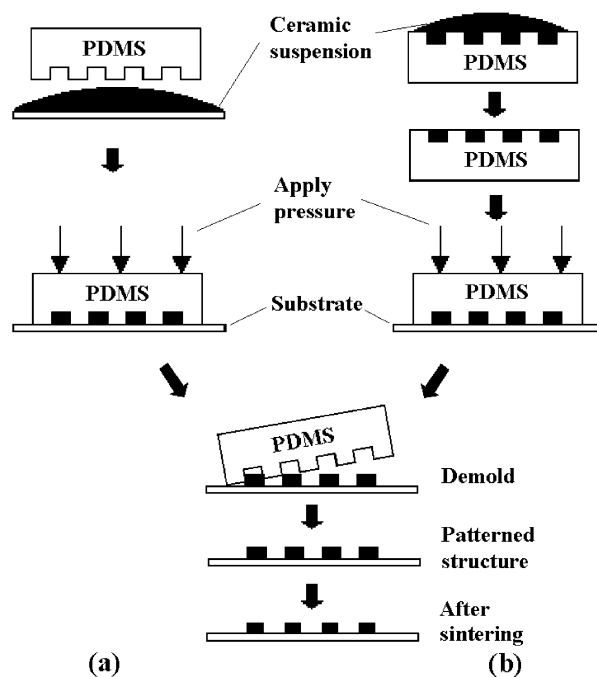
Schematic procedures of soft molding: (A) embossing; (B) microtransfer molding ( $\mu$ TM).
